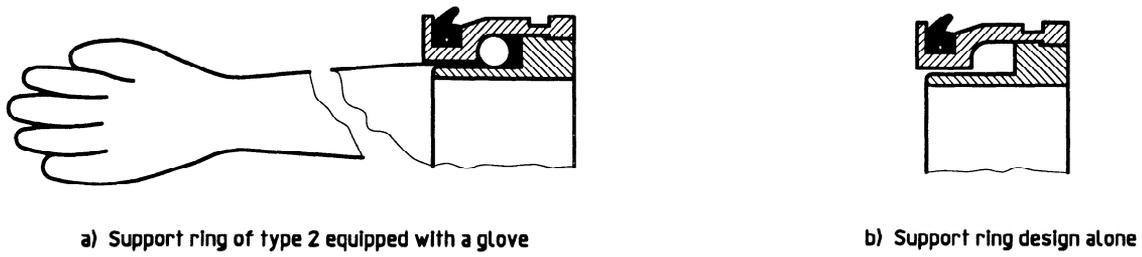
Elastomeric glove fitted on an ejectable support ring of type 2
